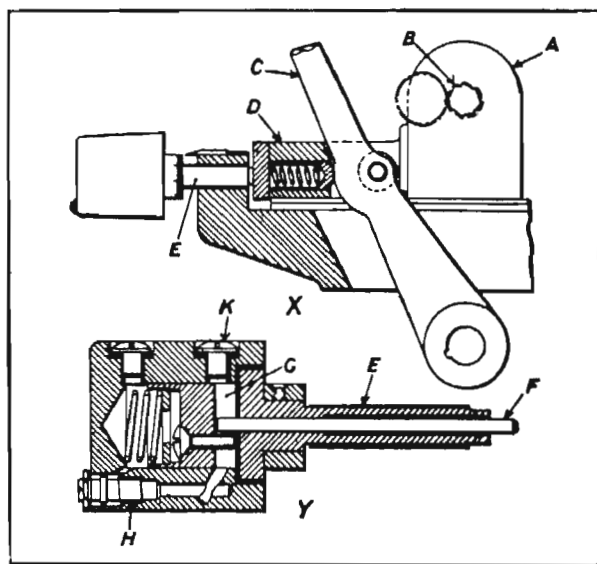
Dashpot Mechanism Designed to Retard the Rate of Movement of Milling Machine In-Feed.
